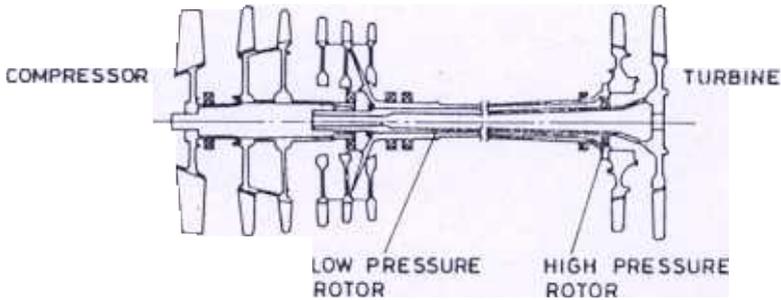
(a). Rotor layout with inter-spool damping¹⁰.
